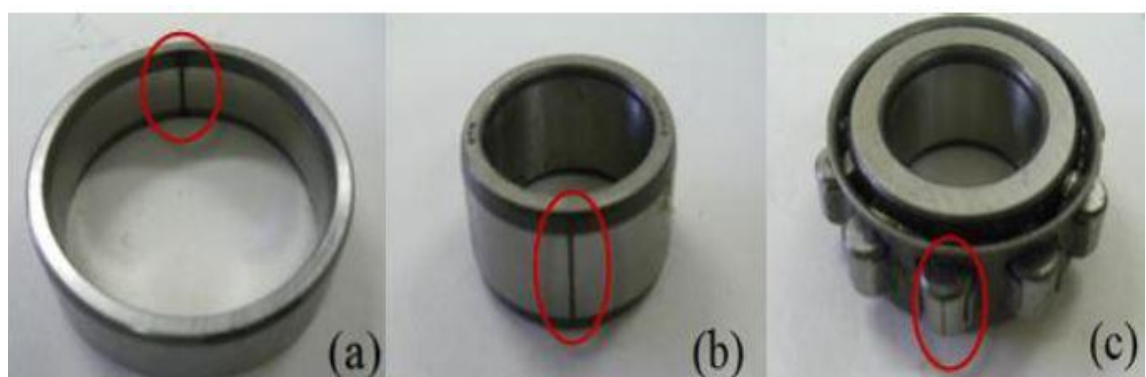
Localised bearing defects: (a) outer-race defect, (b) inner-race defect, and (c) roller element defect [12]
